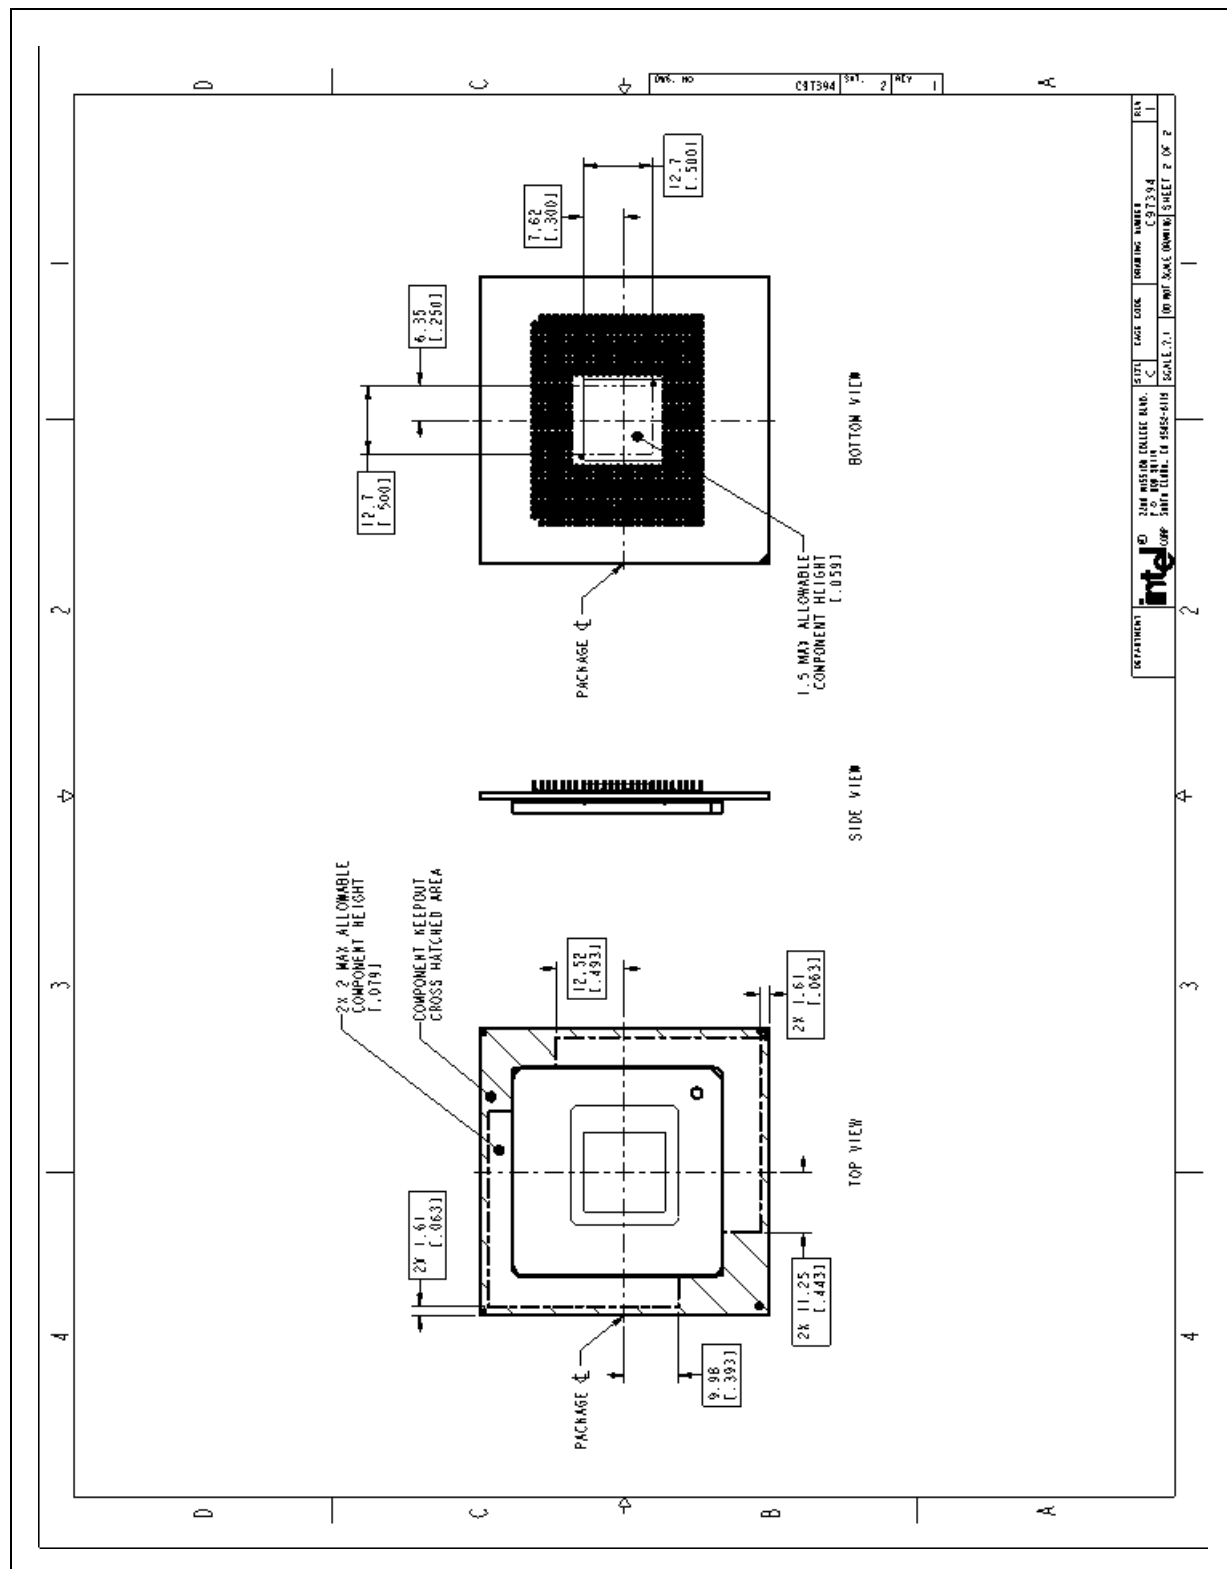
Processor Package Drawing (Sheet 2 of 2)
